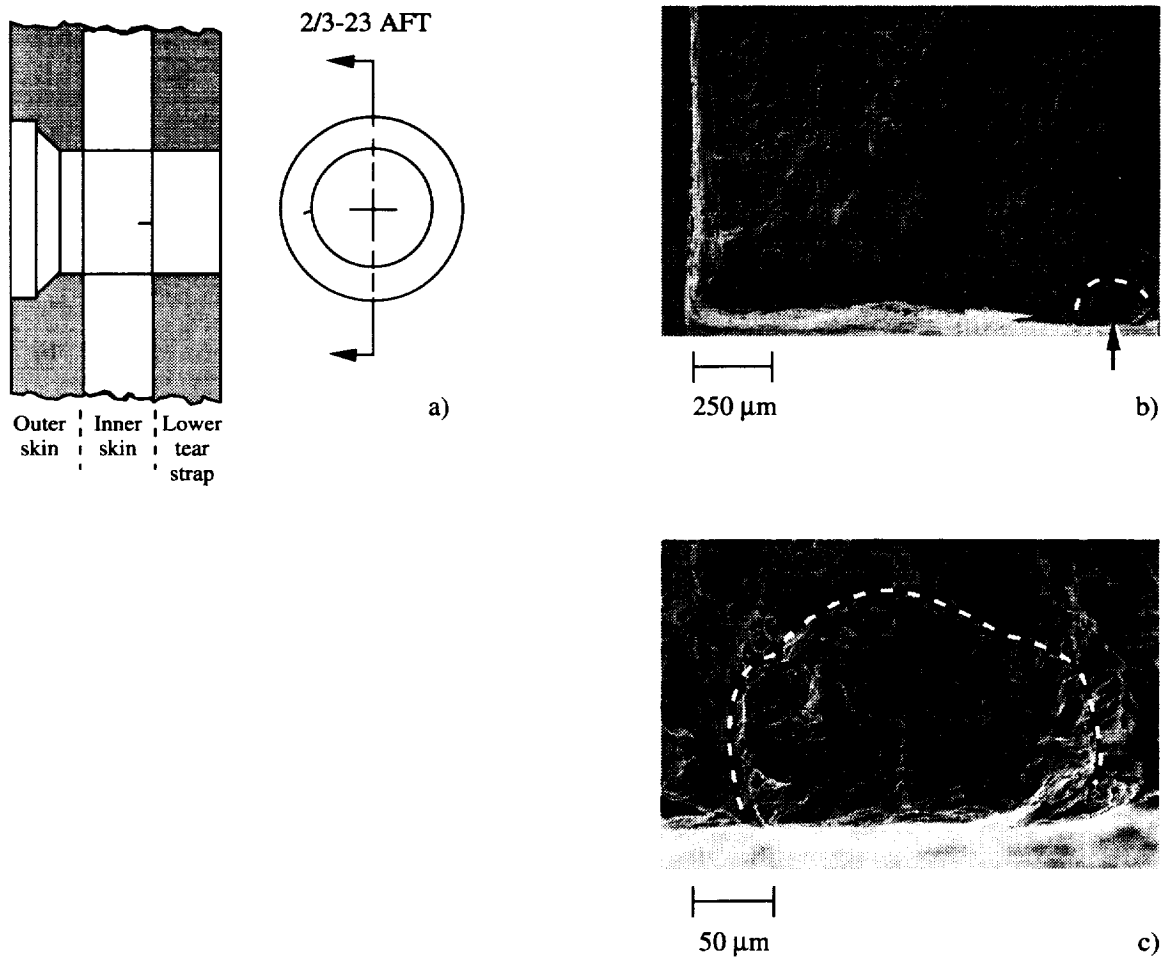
a) The schematic shows the rivet hole 2/3-23 configuration and the location of the inner skin fatigue crack oriented in the aft direction and below the 9 o'clock position. b) The SEM micrograph shows the fatigue crack fracture surface located at the inboard corner of the inner skin. The arrow marks the crack initiation site and the dashed line marks the fatigue crack front. c) The SEM micrograph shows the corner fatigue crack at higher magnification. The dashed line marks the fatigue crack front.
